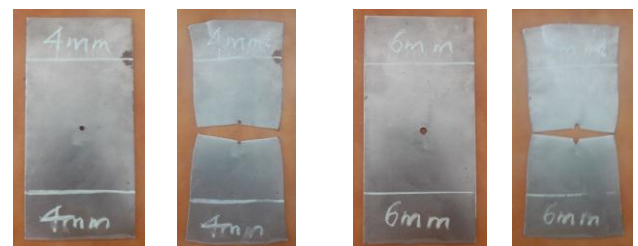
Specimen with 4mm and 6mm holes before and after testing
